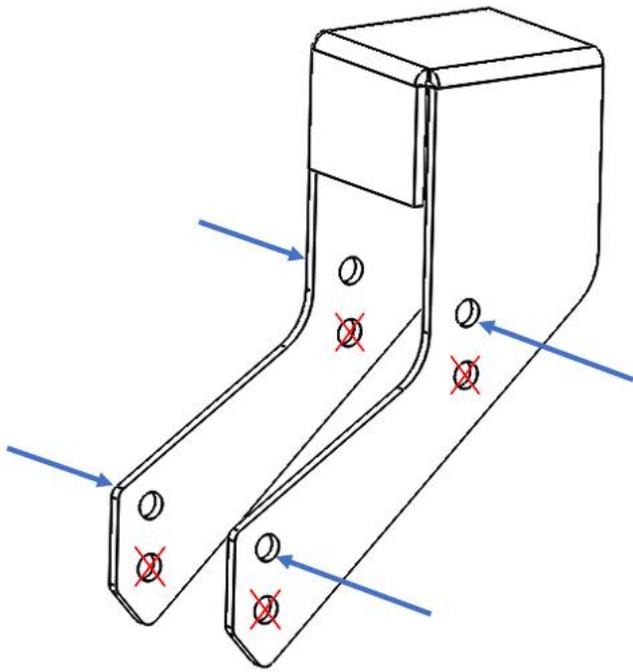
Bolt the top holes of the front bracket to the nerf bar assembly.
